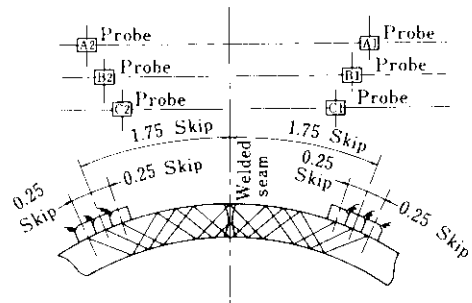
Schematic illustration of the 6-probe ultra sonic test for the welded seam
